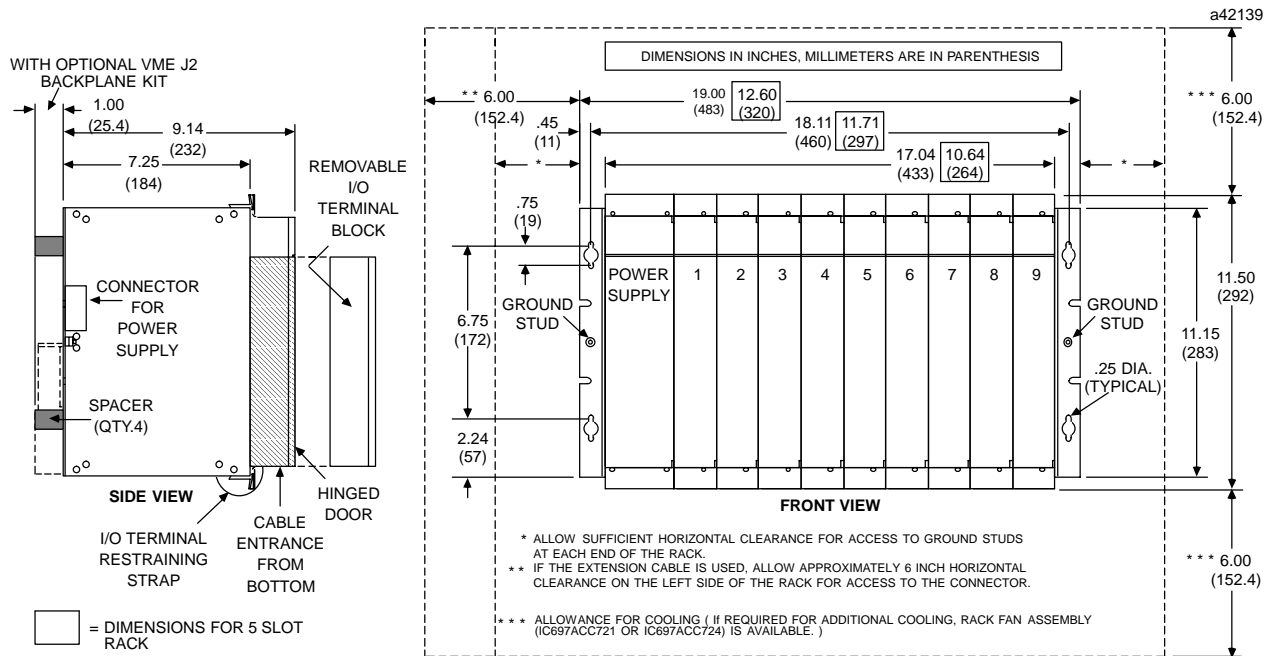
Standard Series 90-70 Rack Mounting Dimensions and Requirements for Standard Rear (Panel) Mount Rack
